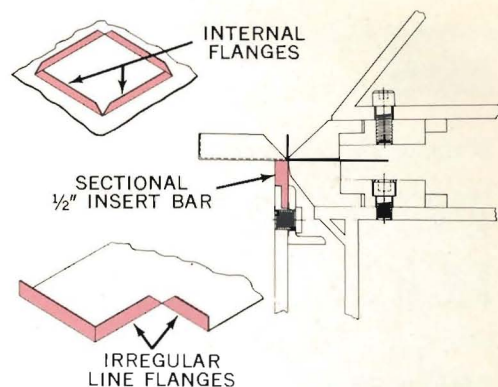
Internal Flanges and Irregular Line Flanges Bent with Sectional $\frac{1}{2}$ " Insert Bar
